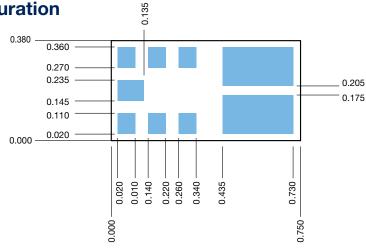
Recommended PCB Solder Pad Configuration (Bottom View)
